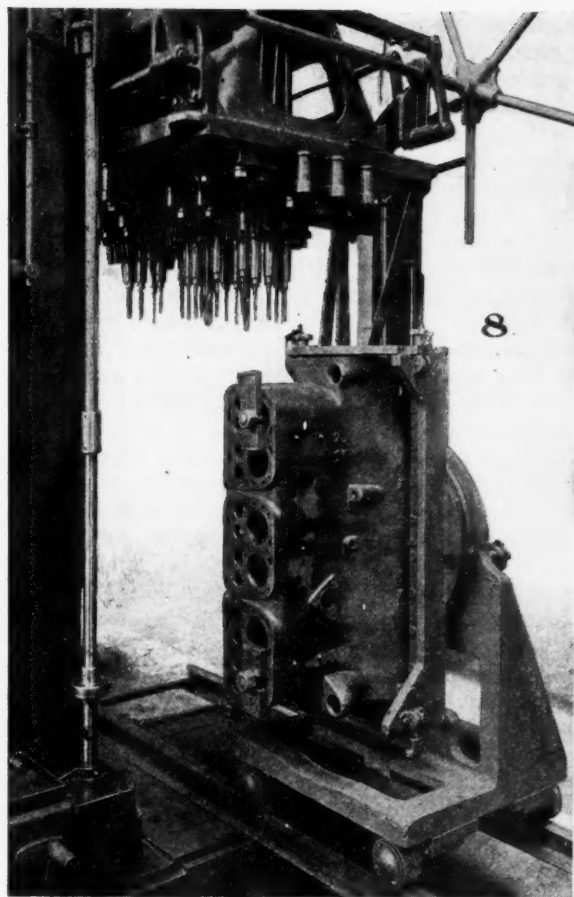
Drilling end flanges in Natco multiple spindle drill press by means of revolving jig. Fig. 9—Rough boring main and camshaft bearings in Rockford two-spindle boring machine. Fig. 10—Finish boring main and camshaft bearings (view from opposite side of machine). Fig. 11—Facing ends of main bearings in Moline Hole Hog miller. Fig. 12—Grinding cylinder bores in Heald grinder
